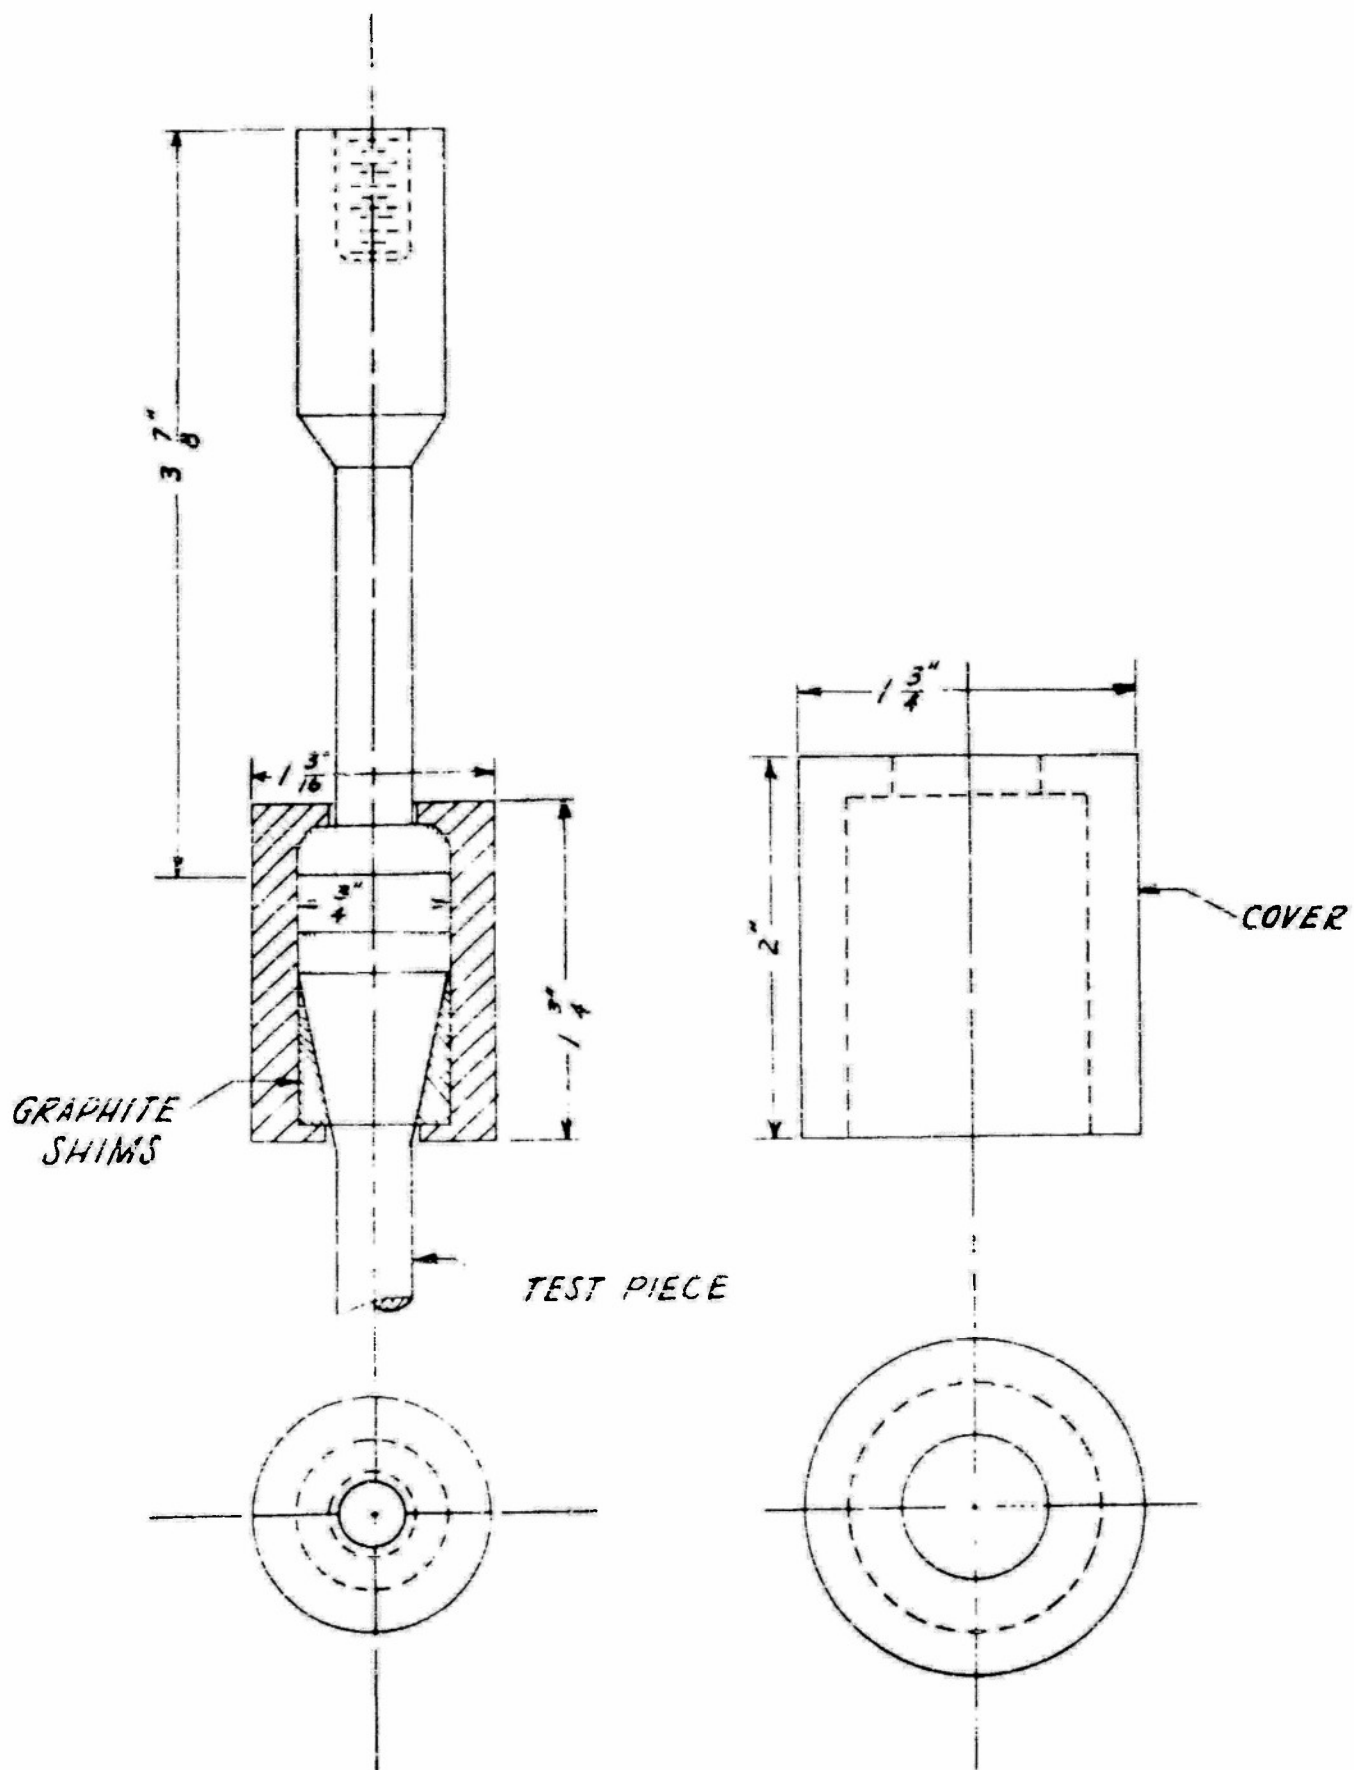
TENSILE GRIPPING ASSEMBLY.
